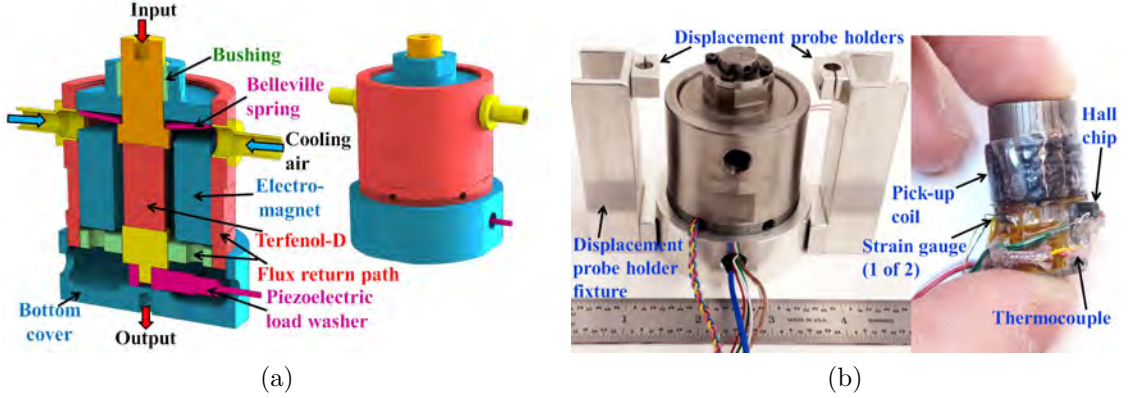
(a) CAD model of the prototype Varispring and (b) manufactured Varispring (air hose fittings removed) with capacitive displacement probe holder fixture attached (left) and Terfenol-D rod with sensors installed (right); passive structural components are 1018 steel, except for the Belleville spring (high carbon steel), bushing (Rulon J), air hose fittings (brass), and bottom cover (Al 7075).
